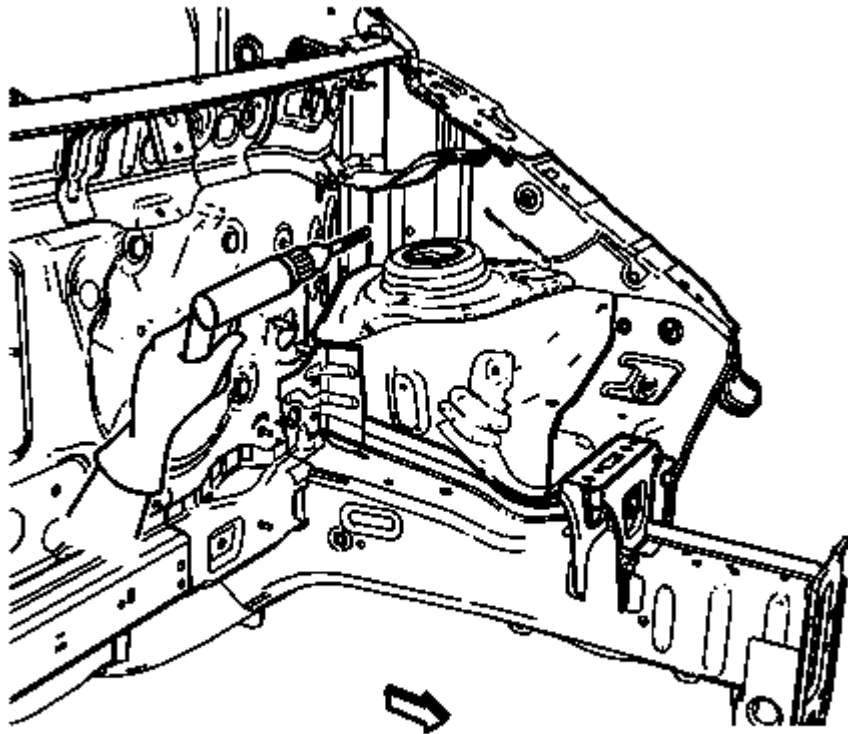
Removing Sealers And Anti-Corrosion Materials
